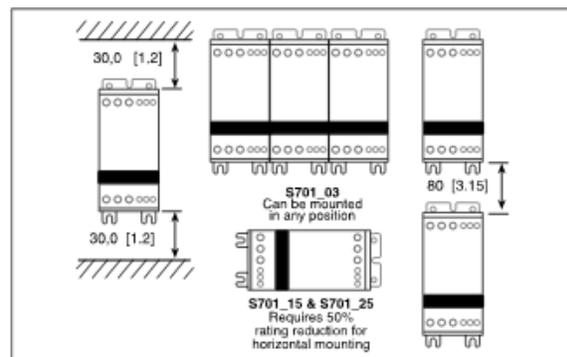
Approx. Dimensions in mm [inches] — Mounting
